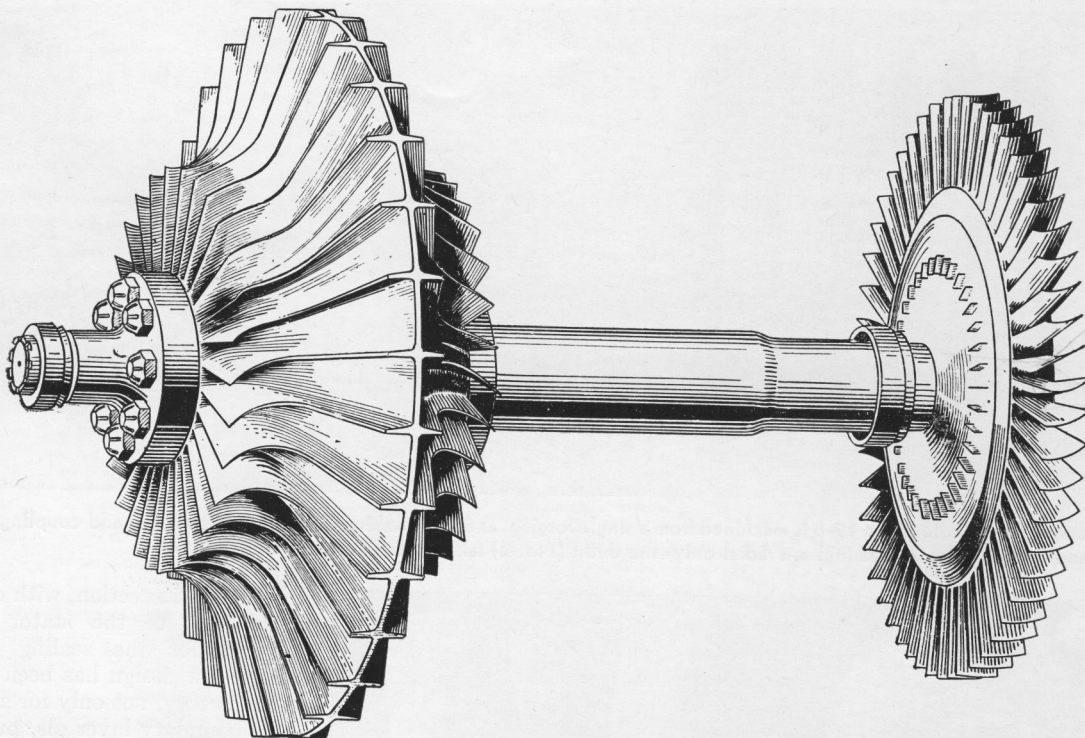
Engine rotor assembly of the GE I-16. The assembly is composed of a turbine wheel and impeller at opposite ends of a composite shaft.
